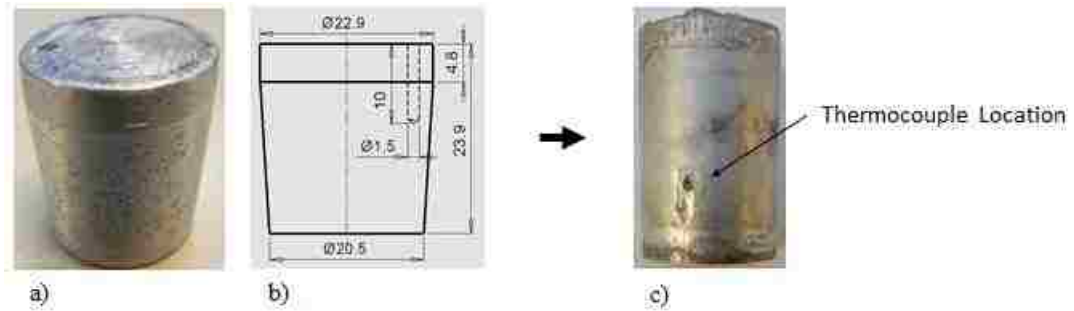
SC/HPDC UMMA test sample; a) picture before SC processing, b) drawing with dimensions (mm) before SC processing, c) UMMA processed as-cast sample.
